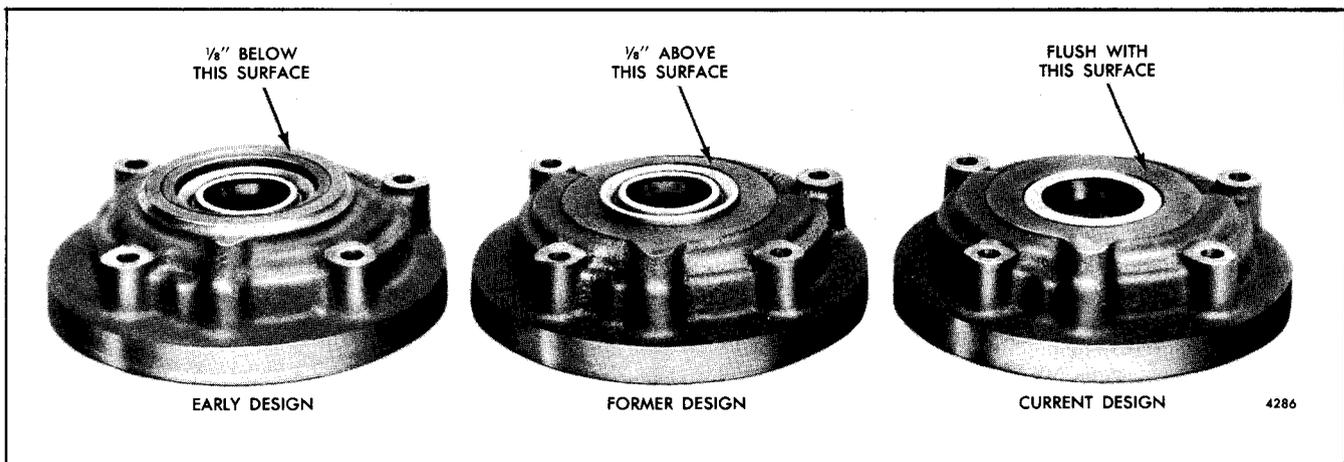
Position of Oil Seals Installed in Marine Gear Oil Pump Housings
